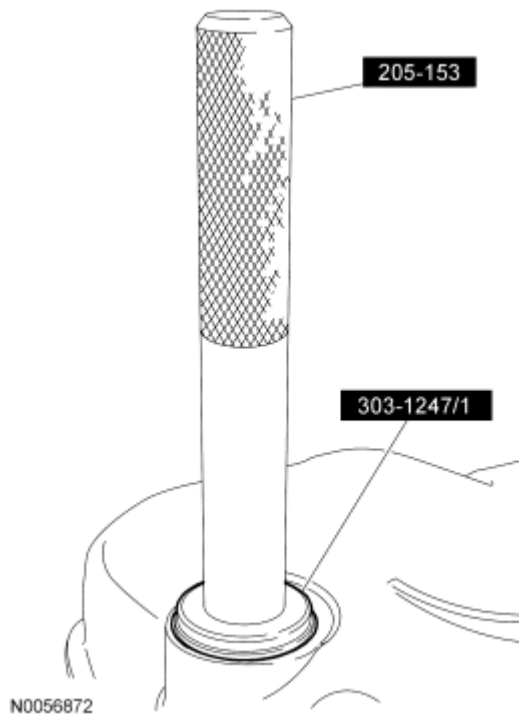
Removing Seals Using Special Tools (205-153) & (303-1247/1)
